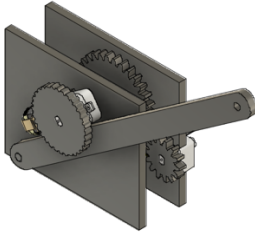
Isometric NE View of gearbox. Bottom arm attached for reference.
